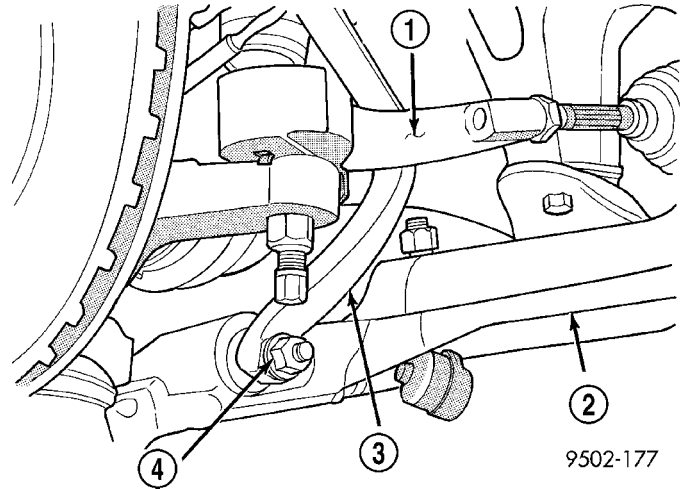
Clevis To Lower Control Arm Attaching Bolt
